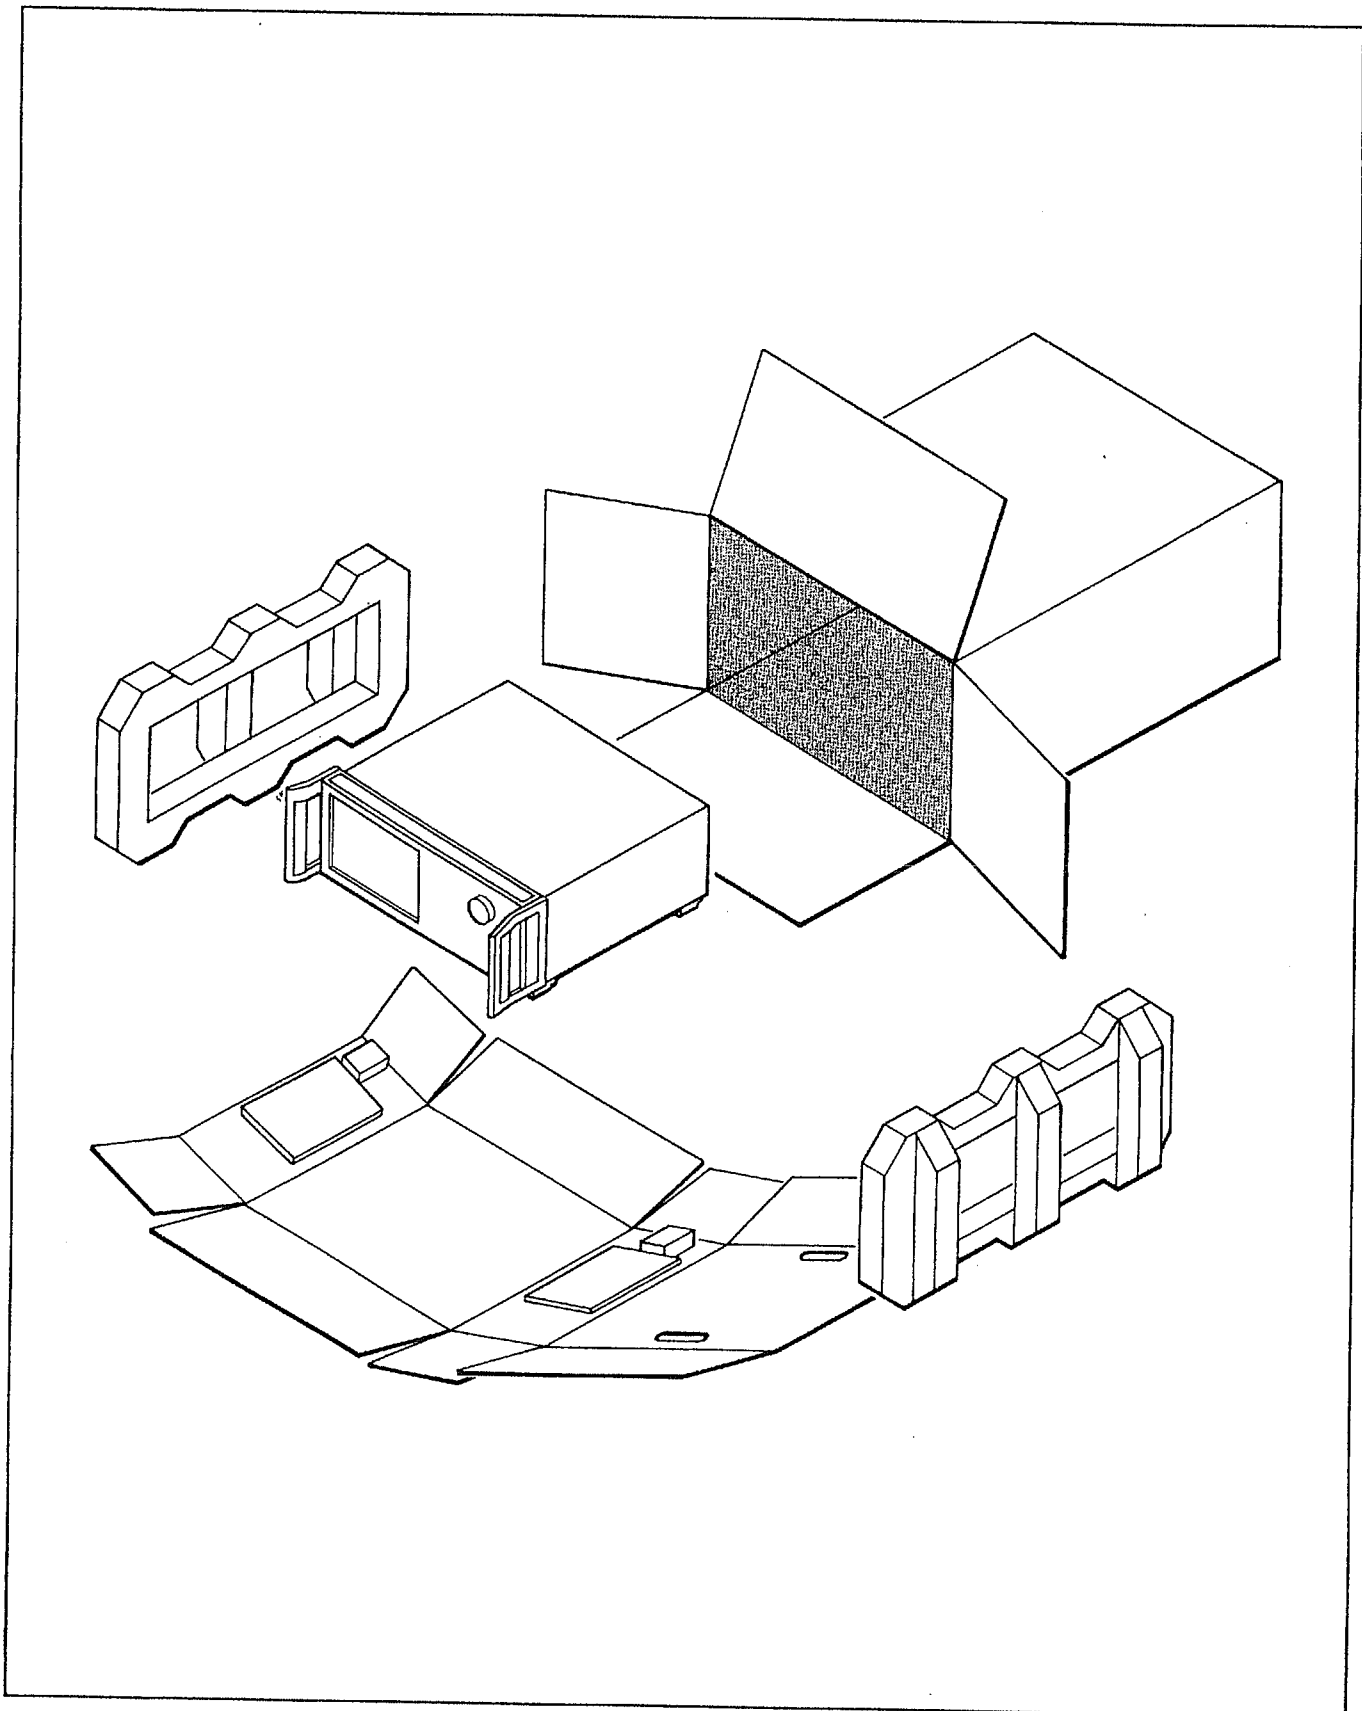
Packaging for Shipment Using Factory Packaging Materials
